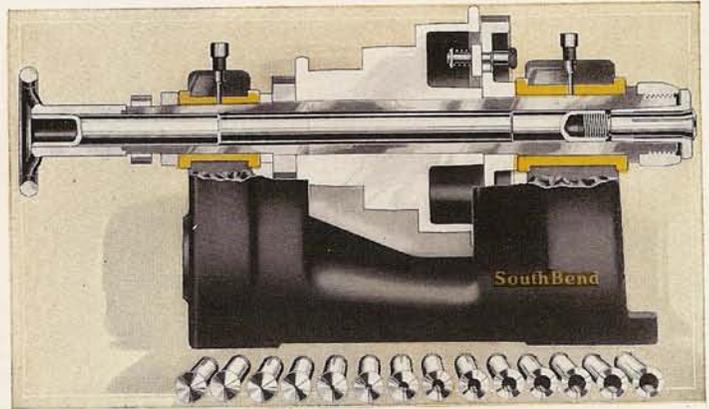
A Cross Section of the Headstock showing application of Hand Wheel Draw-in Collet Chuck
